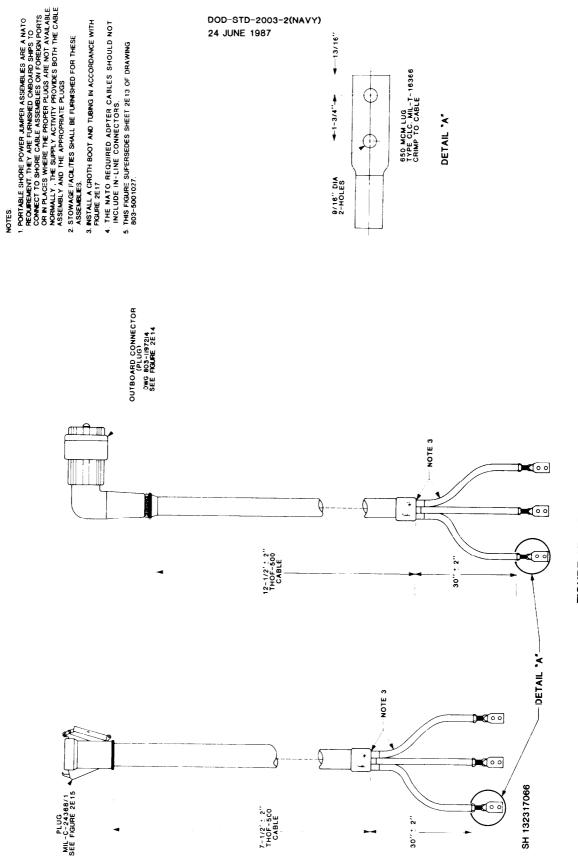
E13. Fortable shore power cable jumper assemblies.
